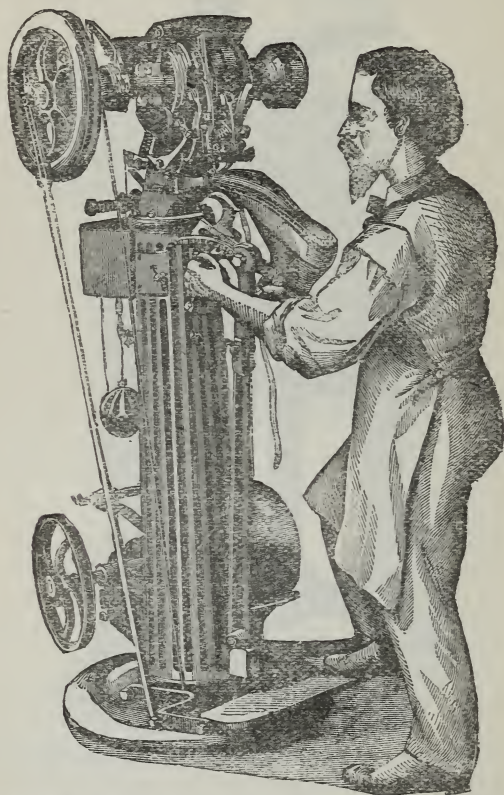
NEW WELT SEWING AND SEW-ROUND MACHINE
